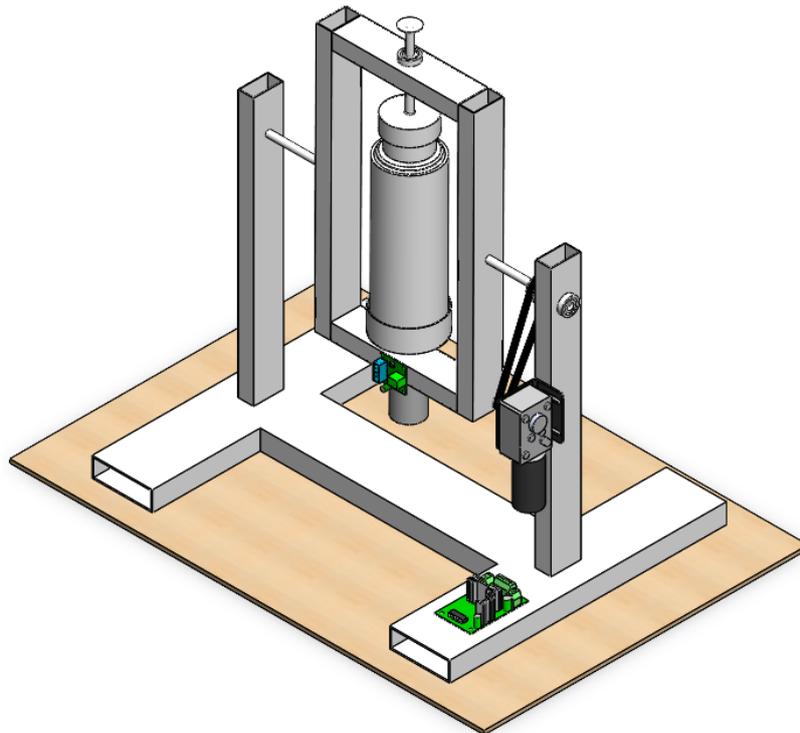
Isometric view of two axis ball mill machine in Solidworks
